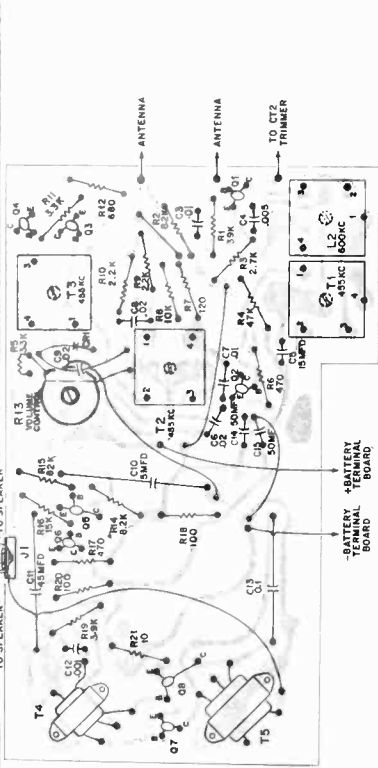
PRINTED CIRCUIT CHASSIS DIAGRAM
